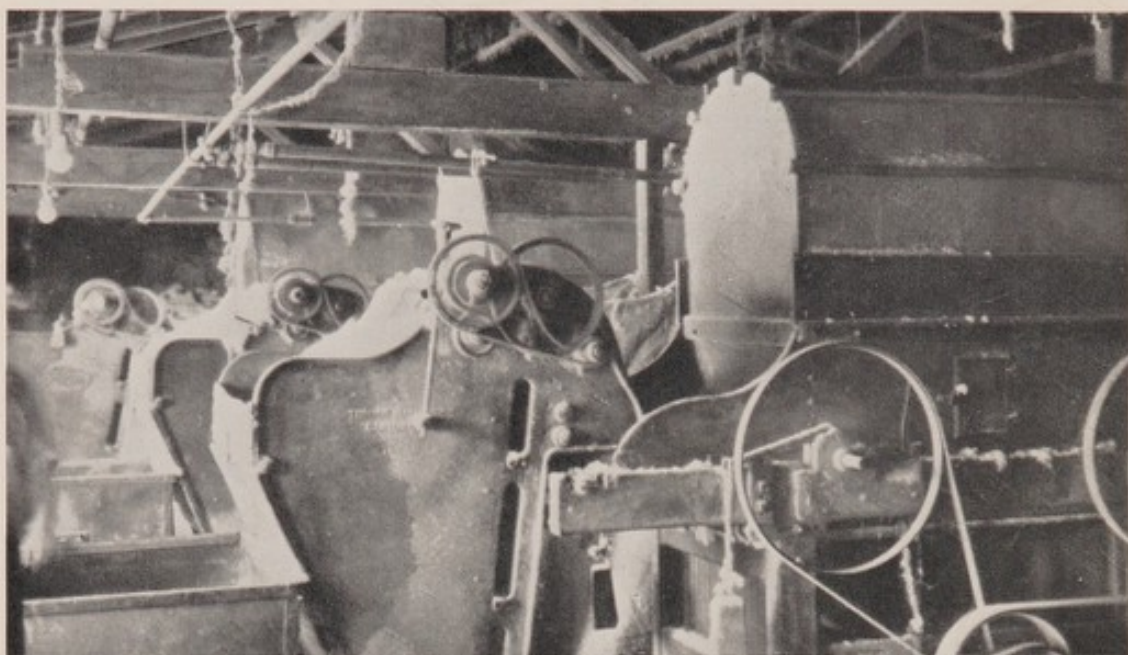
FEED END OF FOUR-SECTION BLOWER.
